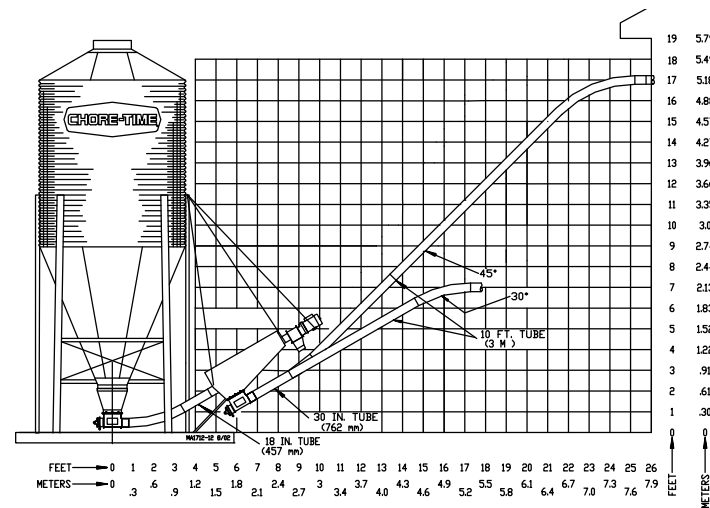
Straight-Out Bin Boot with Feed Screener Boot in-line.
